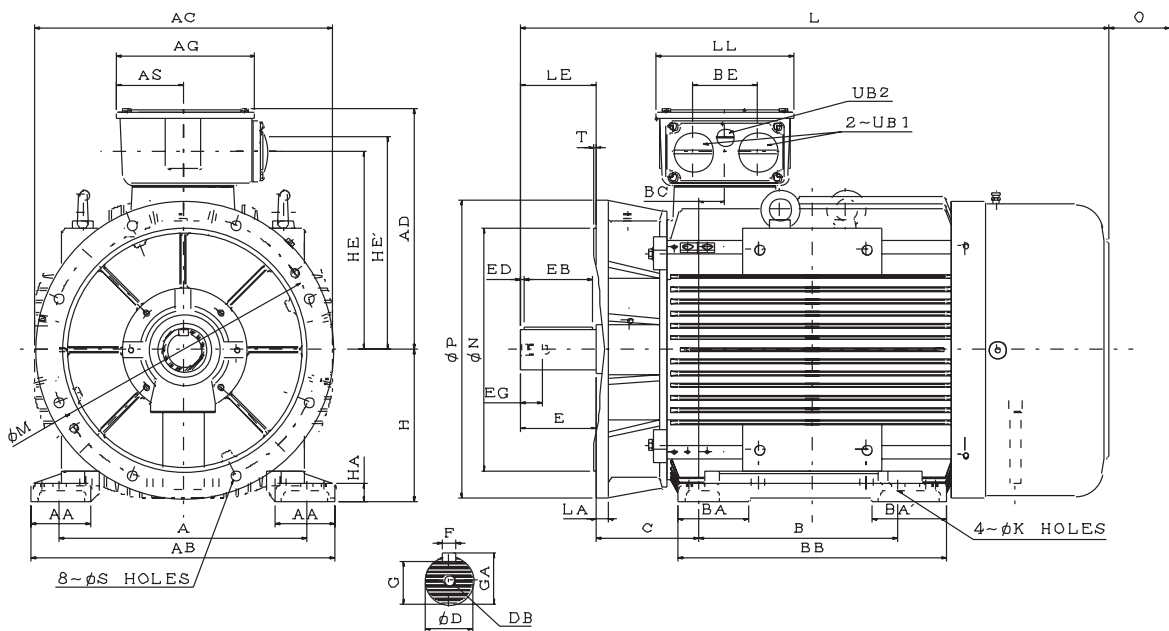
Outline drawing of cast iron design, feet version, mounting B35; frame size 280SA - 280MC
